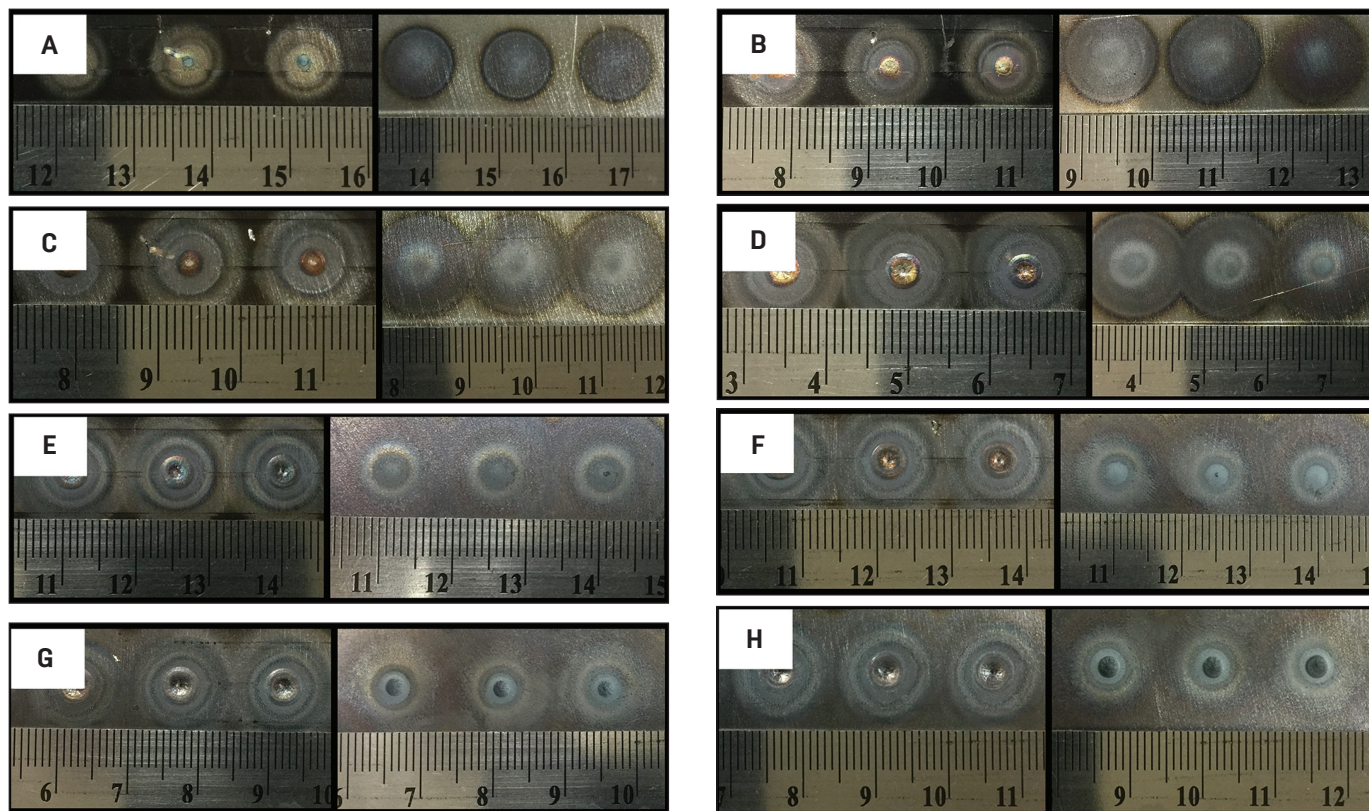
Macroscopic surfaces of welded workpieces at different times: A — 1 s; B — 2 s; C — 3 s; D — 4 s; E — 5 s; F — 6 s; G — 7 s; H — 8 s.
